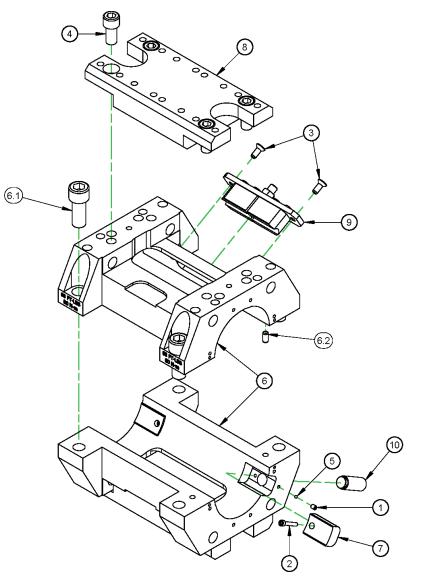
BORING/FACING TOOL ARM CHART ASSEMBLY (P/N 86638)
